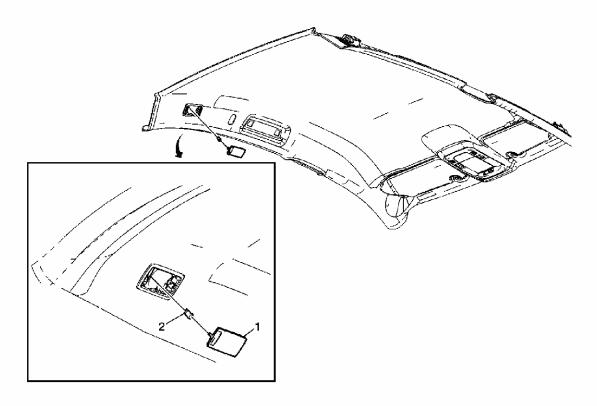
Locating Reading Lamp Bulb Courtesy of GENERAL MOTORS CORP.
